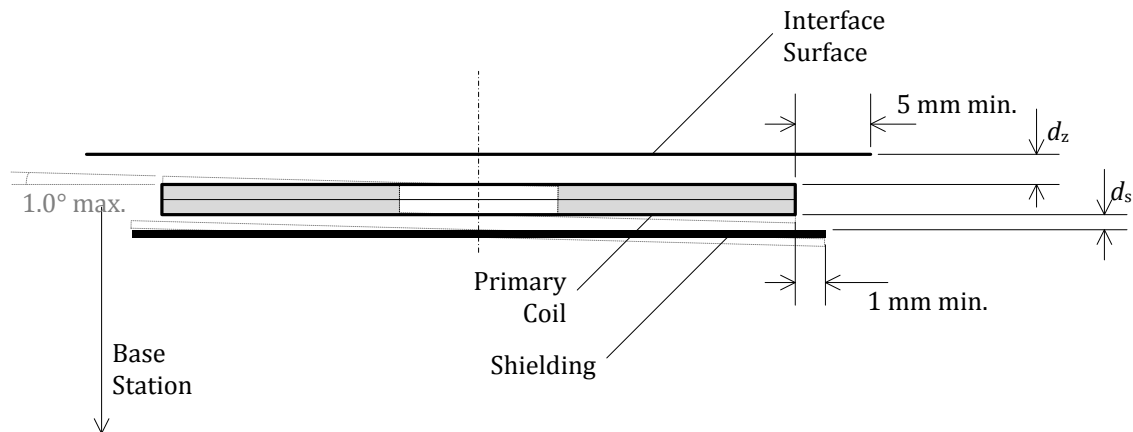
Primary Coil assembly of Power Transmitter design A3
